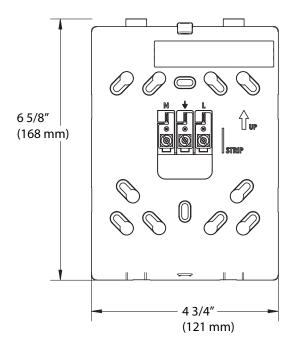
Wireless Input/Output unit Mounting Plate Dimensions
